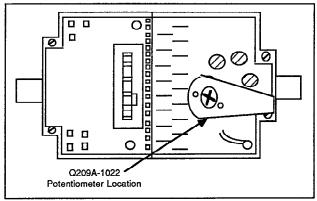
Motor Mounted Potentiometer (Q209A-1022) Location
